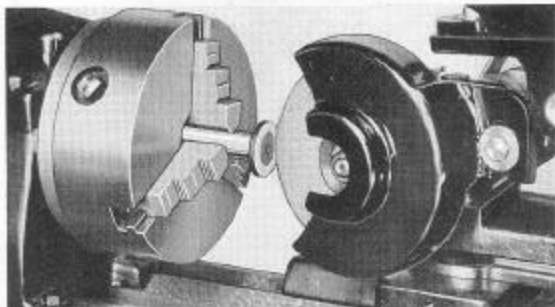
Making a Replacement Valve. Complete replacement valves may be machined in the lathe to suit all requirements. The valve may be made of bar steel, an old shaft, or other suitable material. No special equipment is required.
